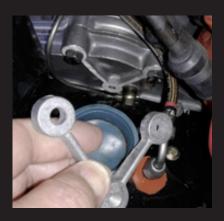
Cutting off the in-the-way air pump mount casting for 911s.
